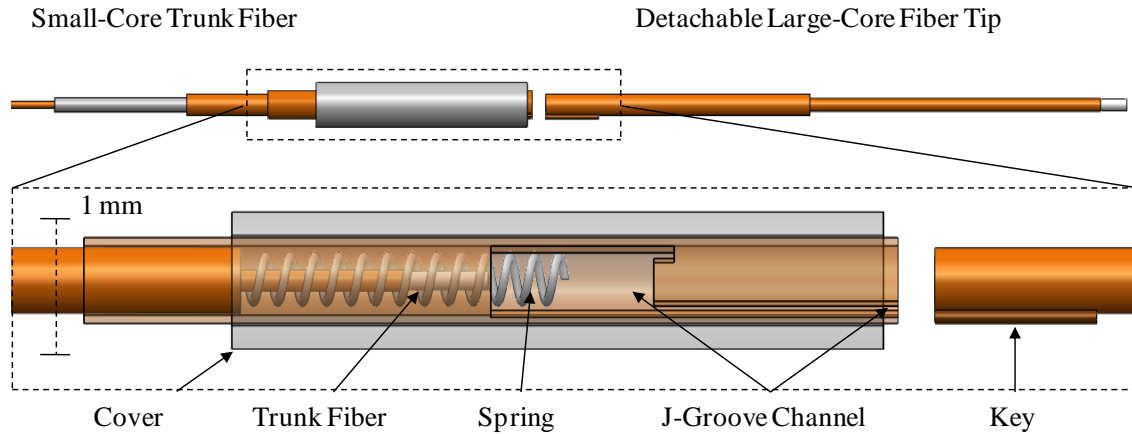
Design of fiber with detachable tip and a close-up view of the spring loaded locking mechanism.
